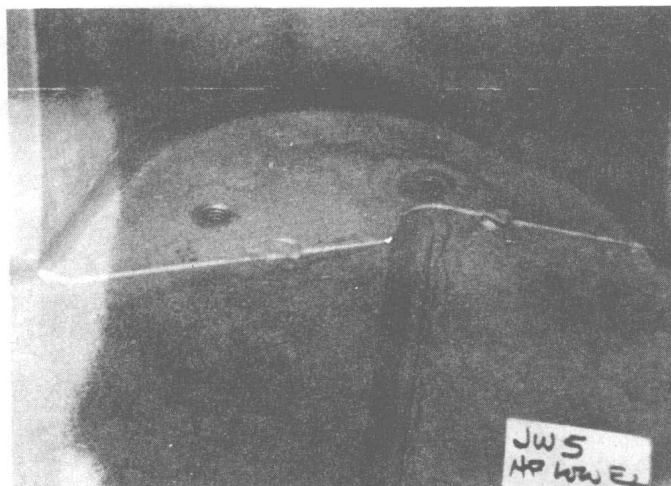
View of Support Pad Recess in Turbine Shell Casting Illustrating Cracking at Internal Radius.
